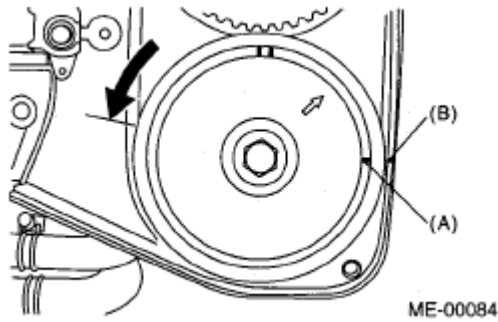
Identifying Mark On Exhaust Cam Sprocket (LH) And Timing Belt Cover
